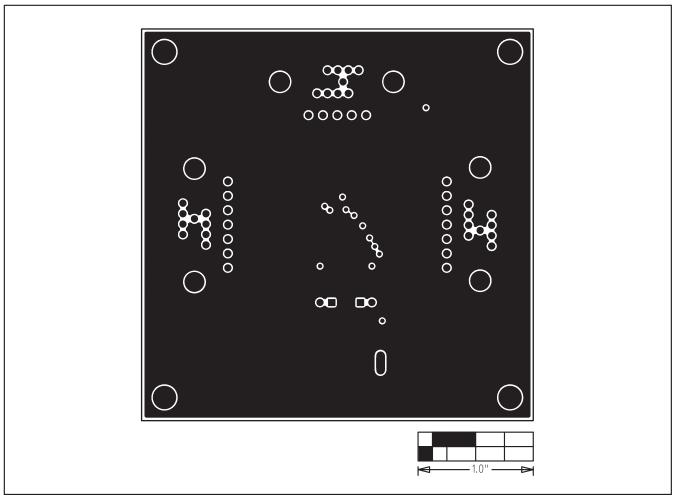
MAX4885E EV Kit PCB Layout—GND Layer 2
